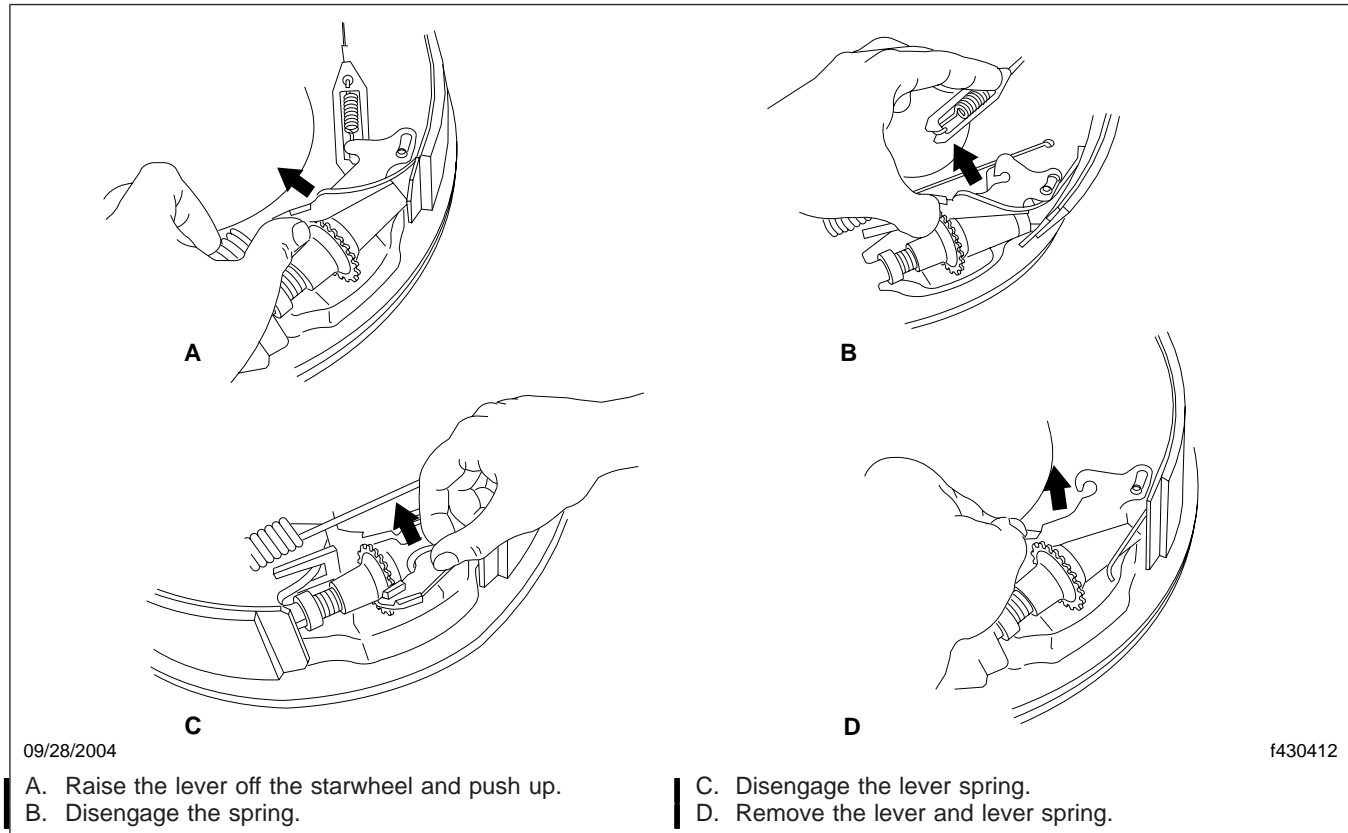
, Adjuster Lever and Adjuster Spring Removal
